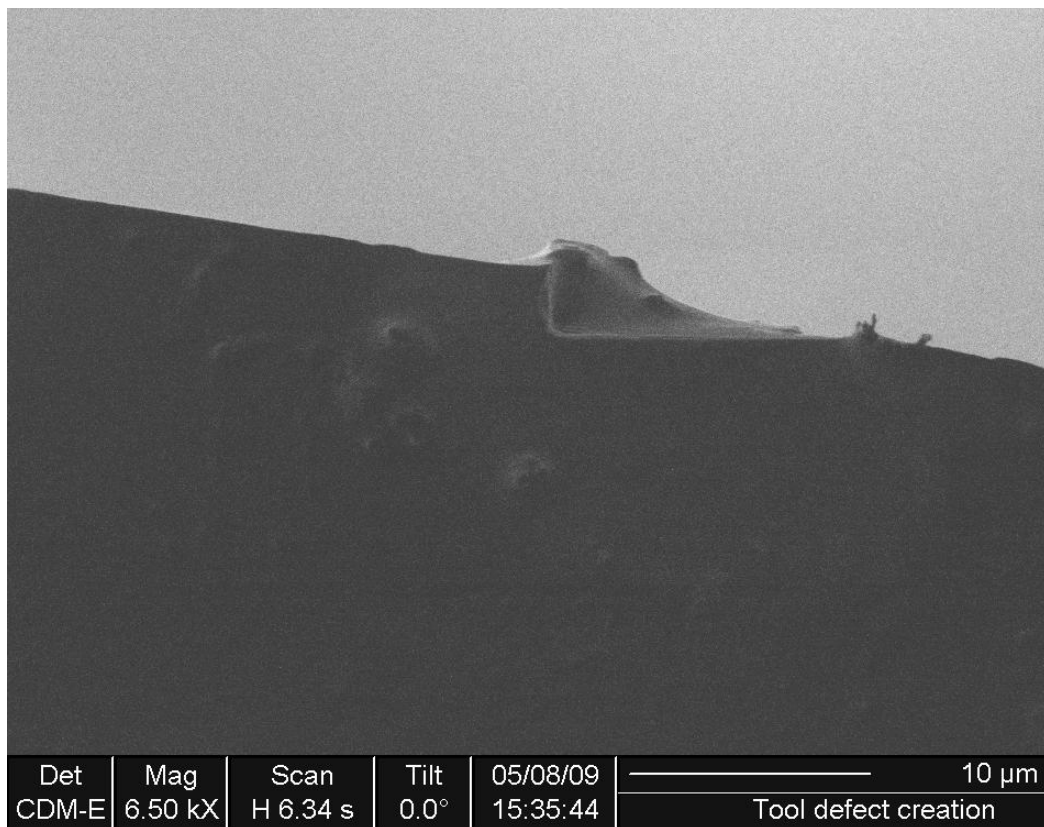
The diamond tool during FIB machining; viewed from directly above the tool using the FIB apparatus.
